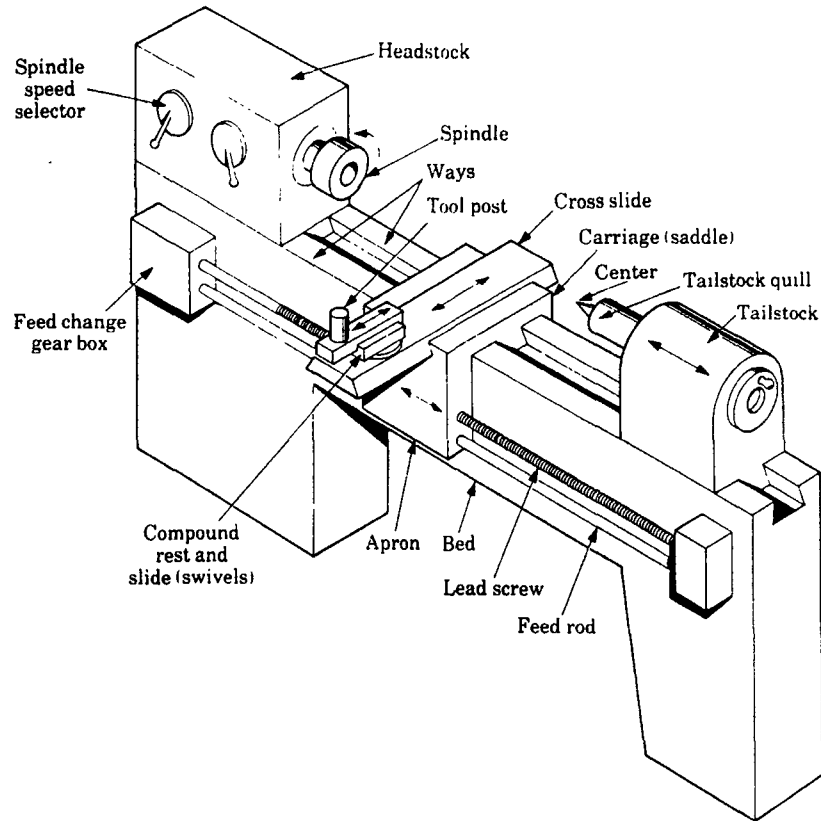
Example of a Typical Lathe [Ko 1995]
